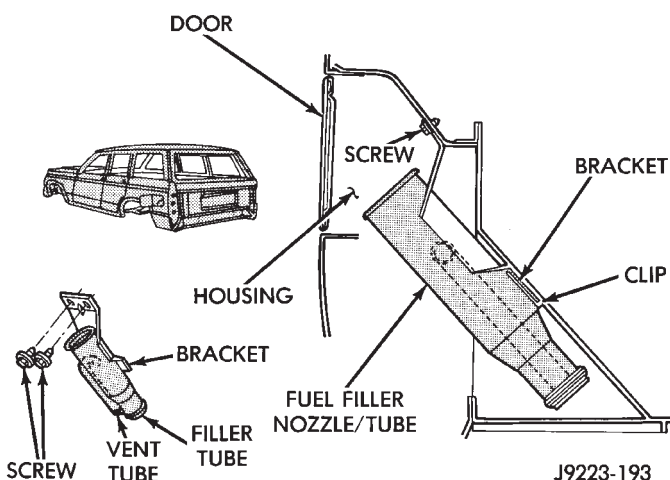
Fuel Filler Nozzle/Tube Removal/Installation—XJ Vehicles
